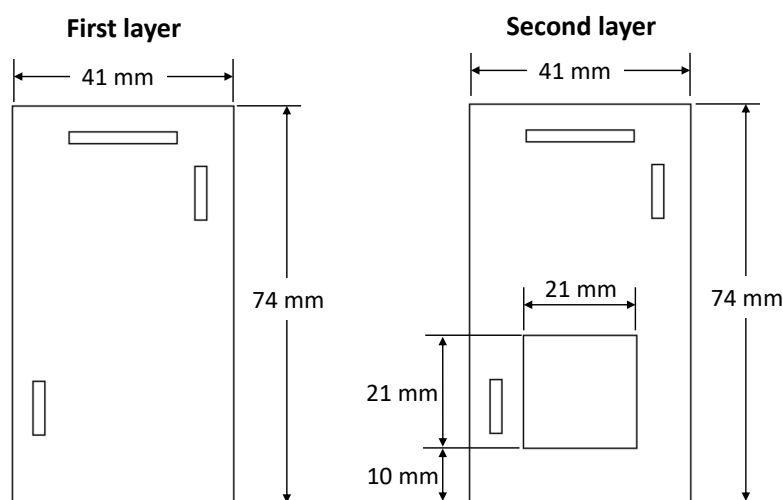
Dimensions of the first and second layer of the point-of-care device. The dimensions of the two layers shown were used to laser cut two 2-mm thick PMMA sheets.
